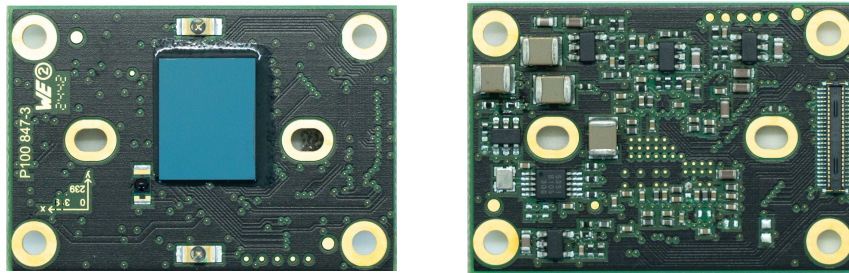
epc670 Board-to-Board Connector Chip Carrier
